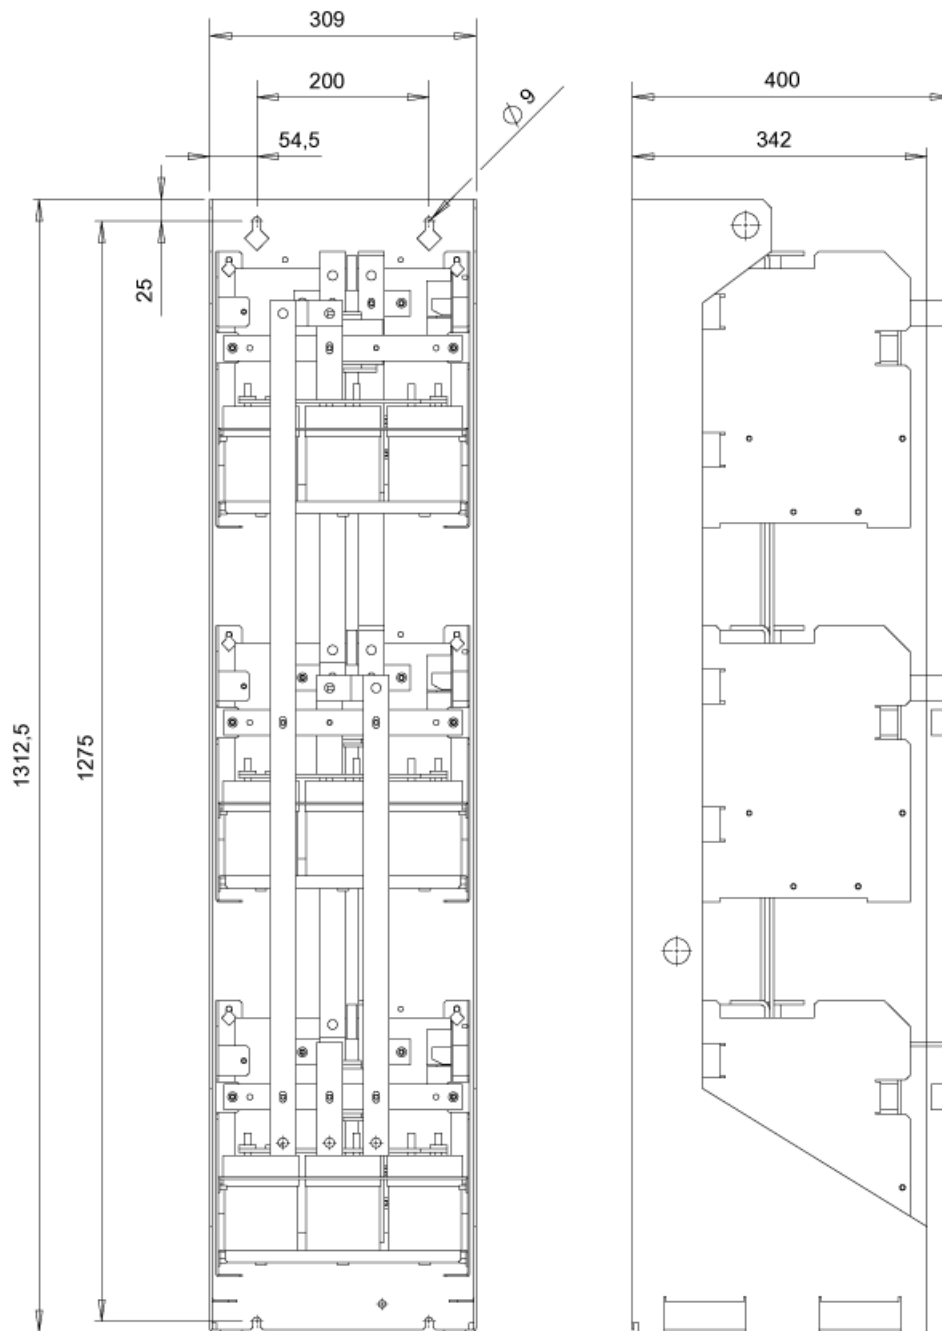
Dimension drawing of the voltage peak limiter, type 3
